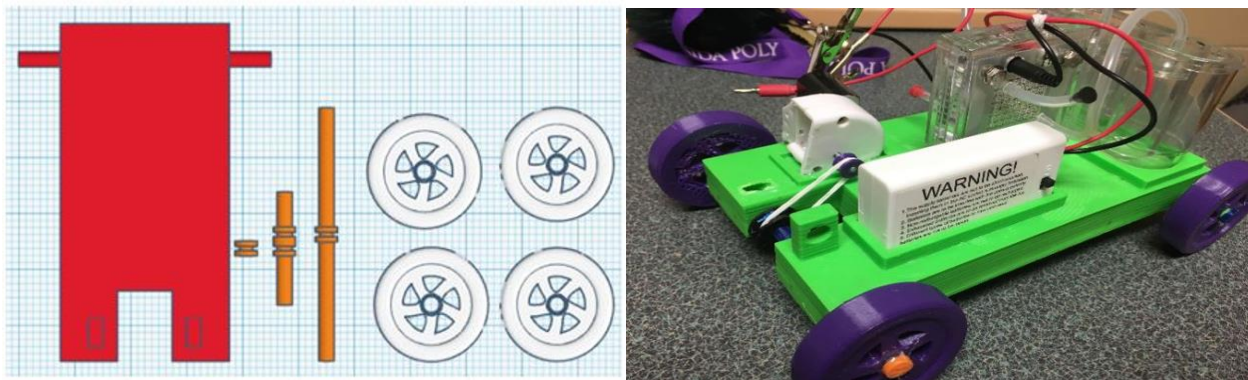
The 3D printed parts created in the design phase (left) and the final design after fabrication (right). The final design was functional, using the fuel cell for forward movement.
